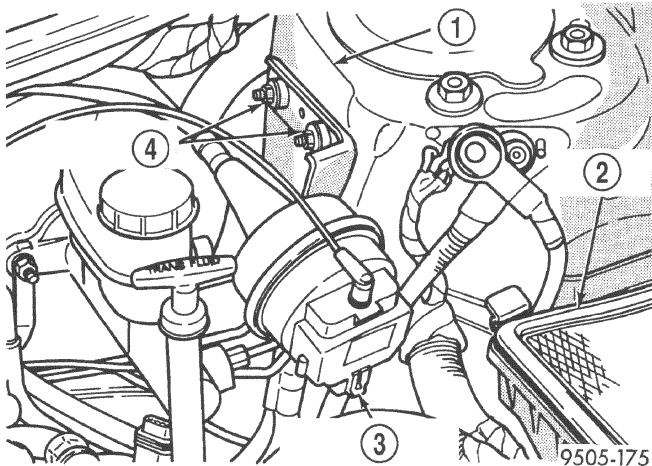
EGR Tube Attachment To Intake Manifold And EGR Valve
